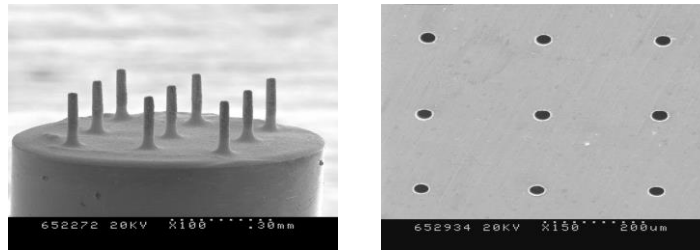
SEM Photographs of Tool Electrodes and Holes Array
